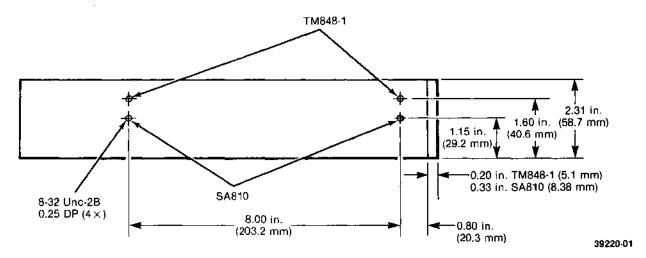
SIDE VIEW MOUNTING HOLE LOCATIONS
